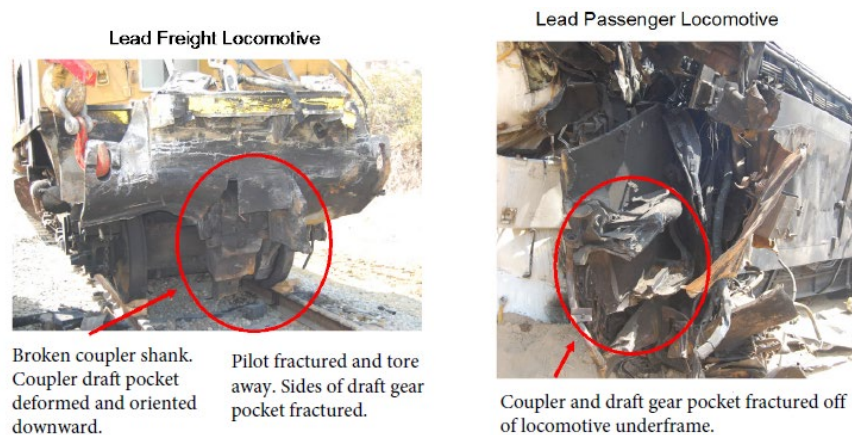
Coupler and Draft Gear Damage, Lead Freight and Passenger Locomotives [4]
